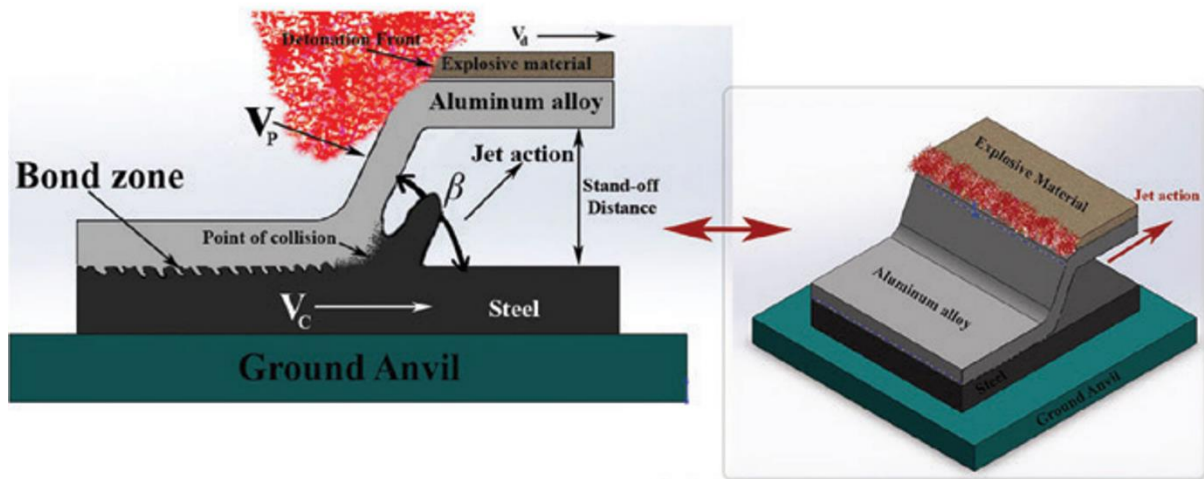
Schematic of explosive bonding between aluminum and steel [35]
